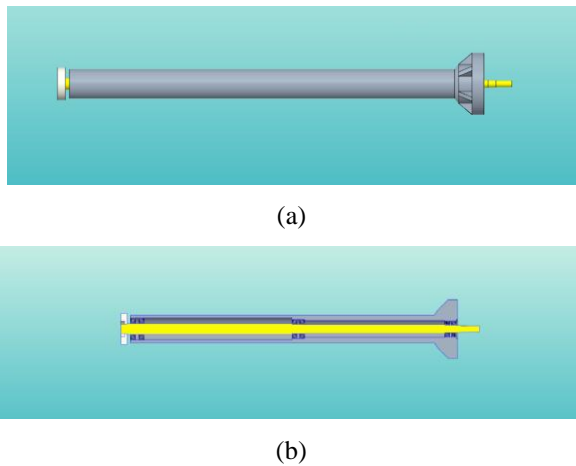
Structure of the deep hole internal grinding shaft tool (a) and (b).
